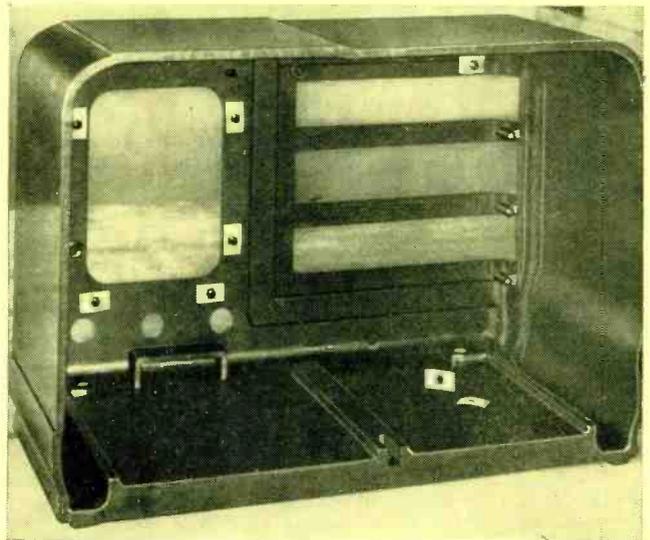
Spring-steel fasteners used in assembly of portable radio cabinet
